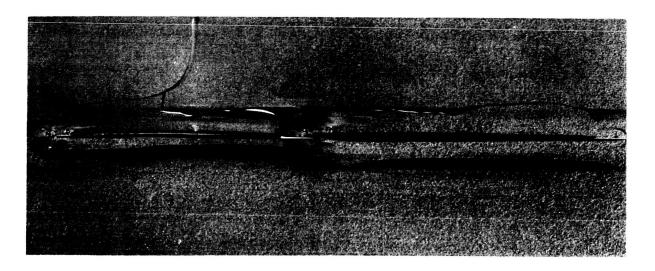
Photograph of Circular Groove Weld Restraint Test in 3/8" Plate of Ta-10W Alloy
